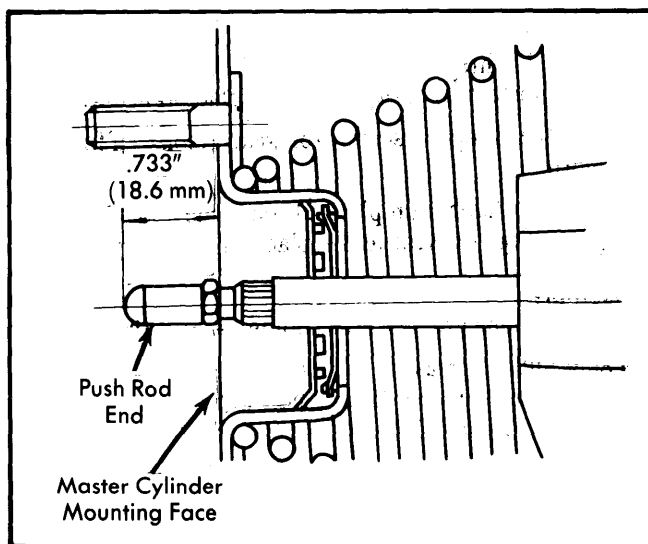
Power Brake Unit Push Rod Measurement Points for Adjustment
